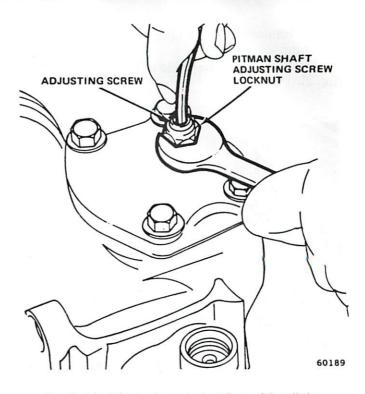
L-14 Adjuster Screw Locknut Removal/Installation
